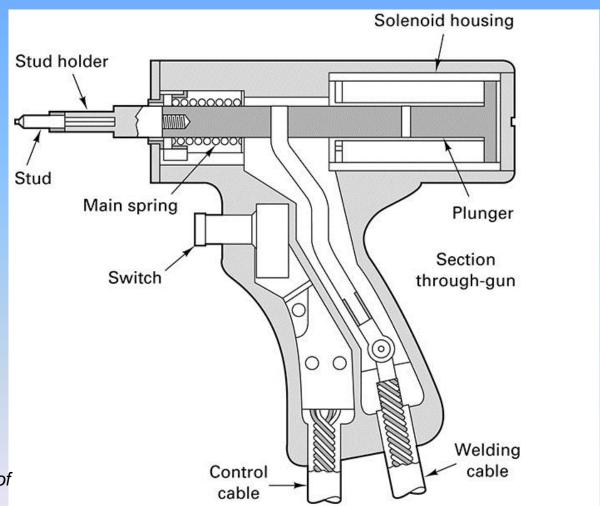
Diagram of a stud welding gun. (Courtesy of American Machinist.)
